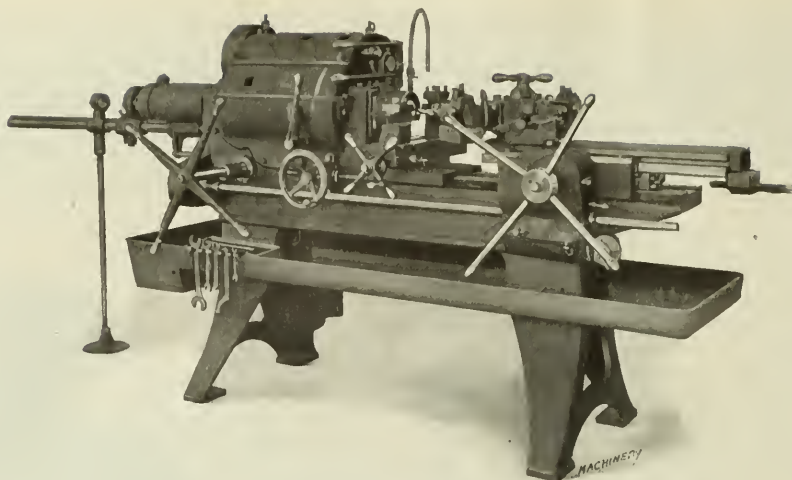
Foster No. 5 Screw Machine with All-gear Head and Bar Equipment
